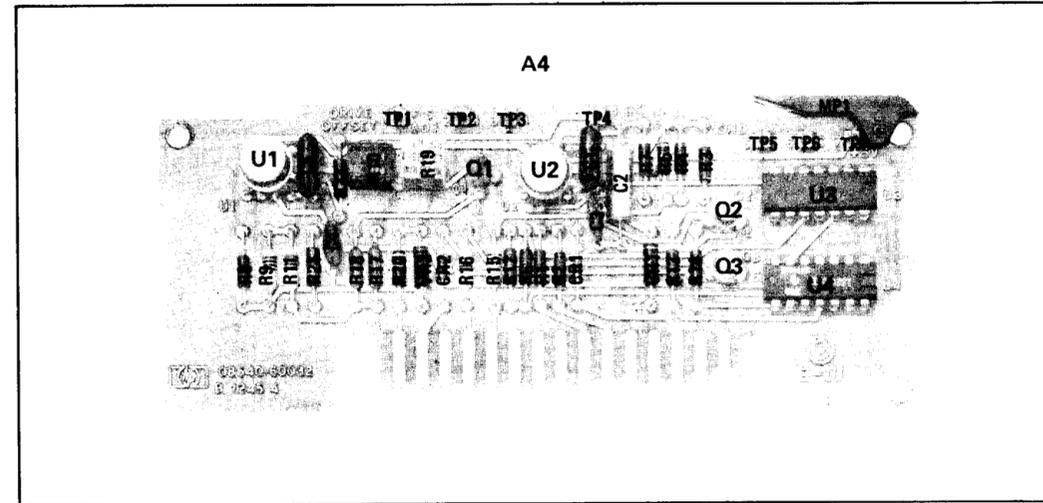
A4 Meter/Annunciator Drive Assembly Component Locations
